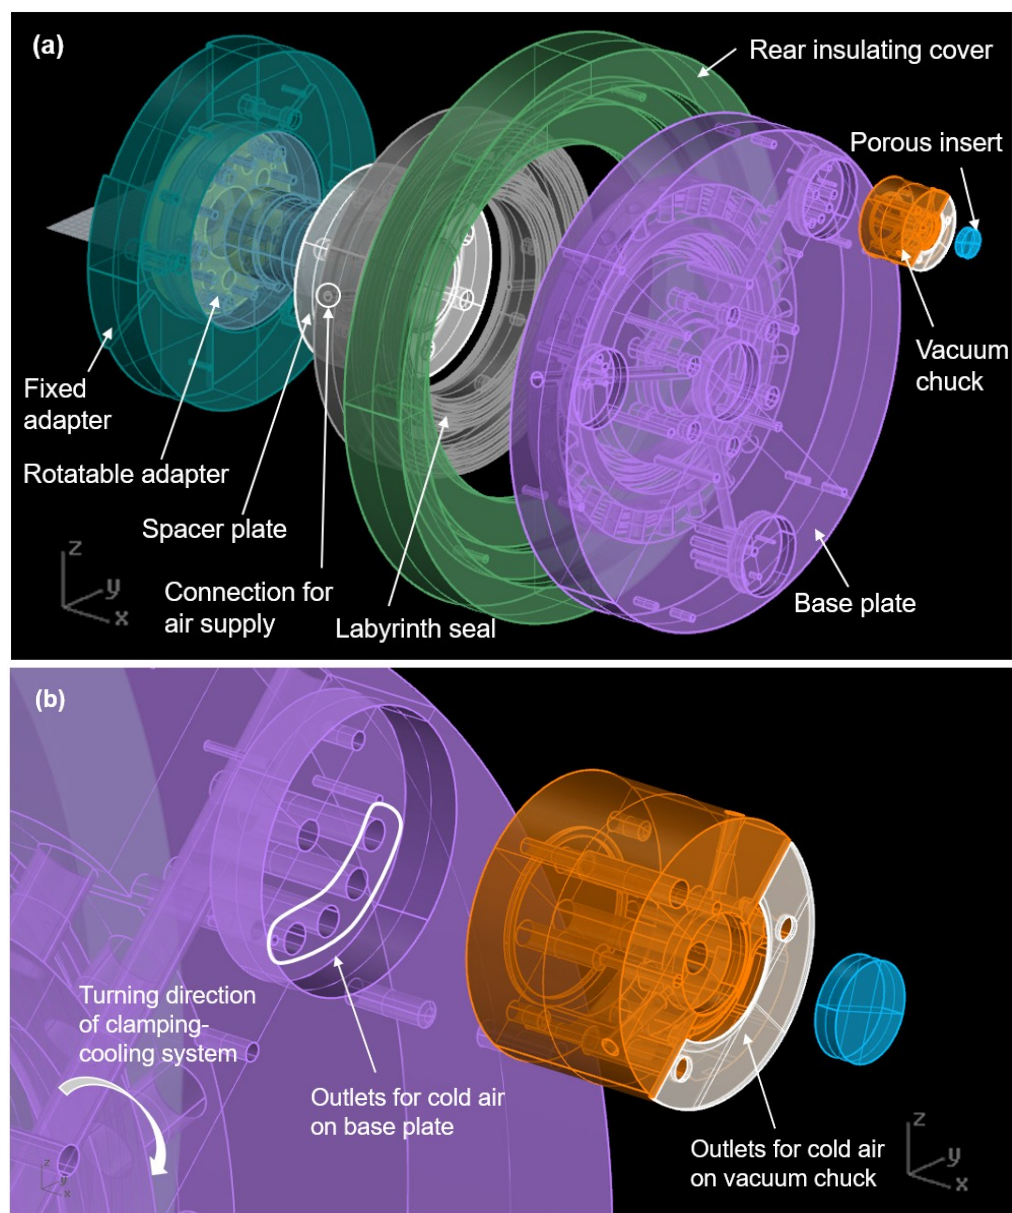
(a) 3D assembly of the clamping-cooling system. (b) Details of the vacuum chuck insert.
